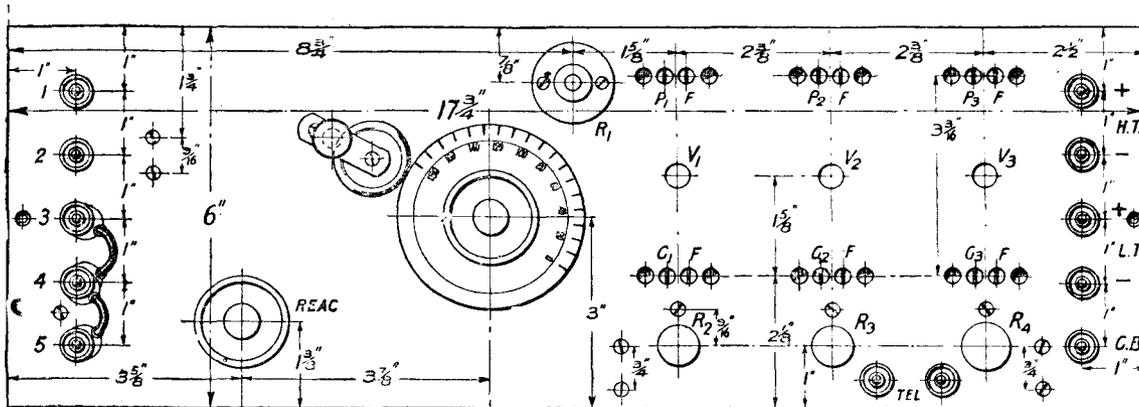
A dimensioned drawing of the front of the panel, showing how the parts are mounted.
